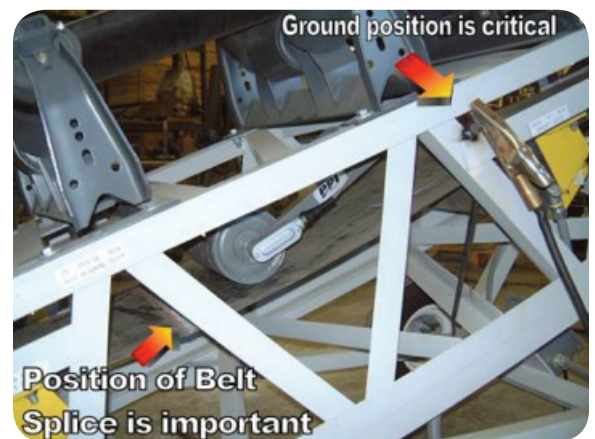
Permanent attachment of 3/4 inch shaft to framework. Component protection for welding has been removed for clarity.
